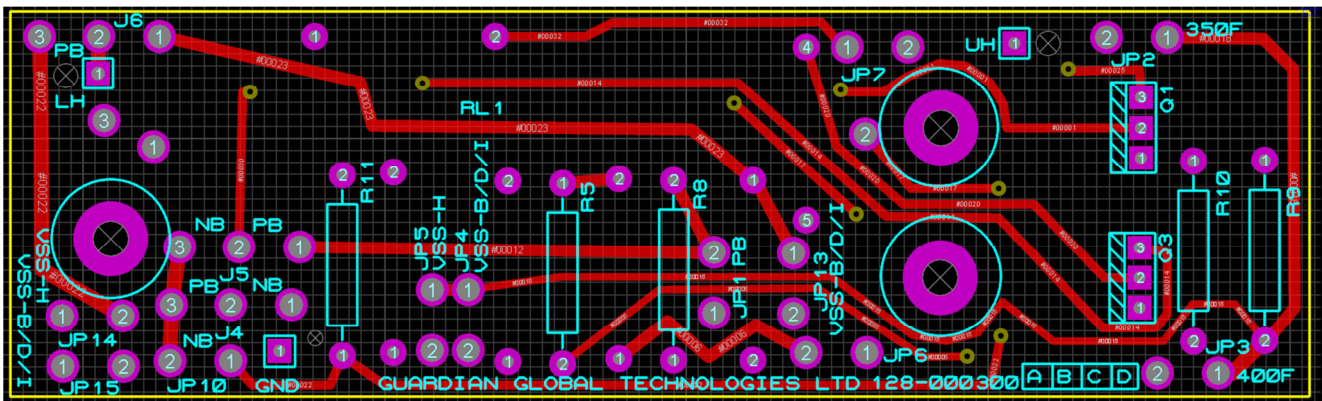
PCB Layout, VSS-Y - 128-00300
